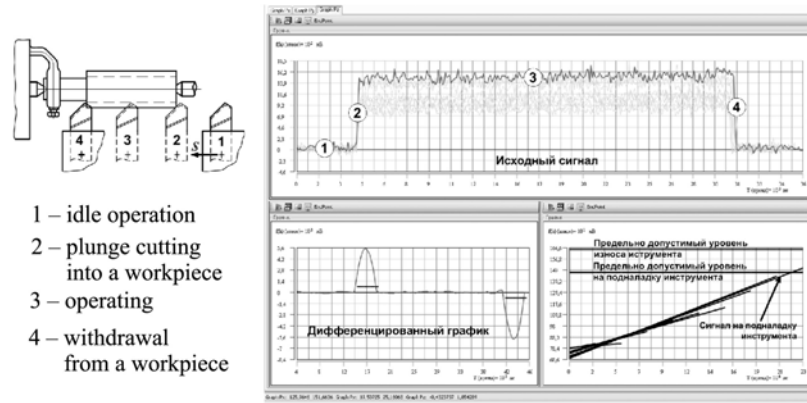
Types of signals from a cutting force sensor while machining a piece.
